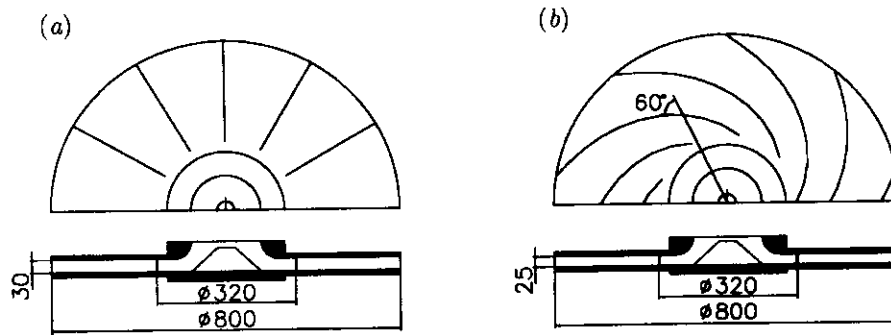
Twelve-bladed radial test impeller (a) and nine-bladed test impeller (b) with sixty-degree logarithmic spiral blades (dimensions in mm).
